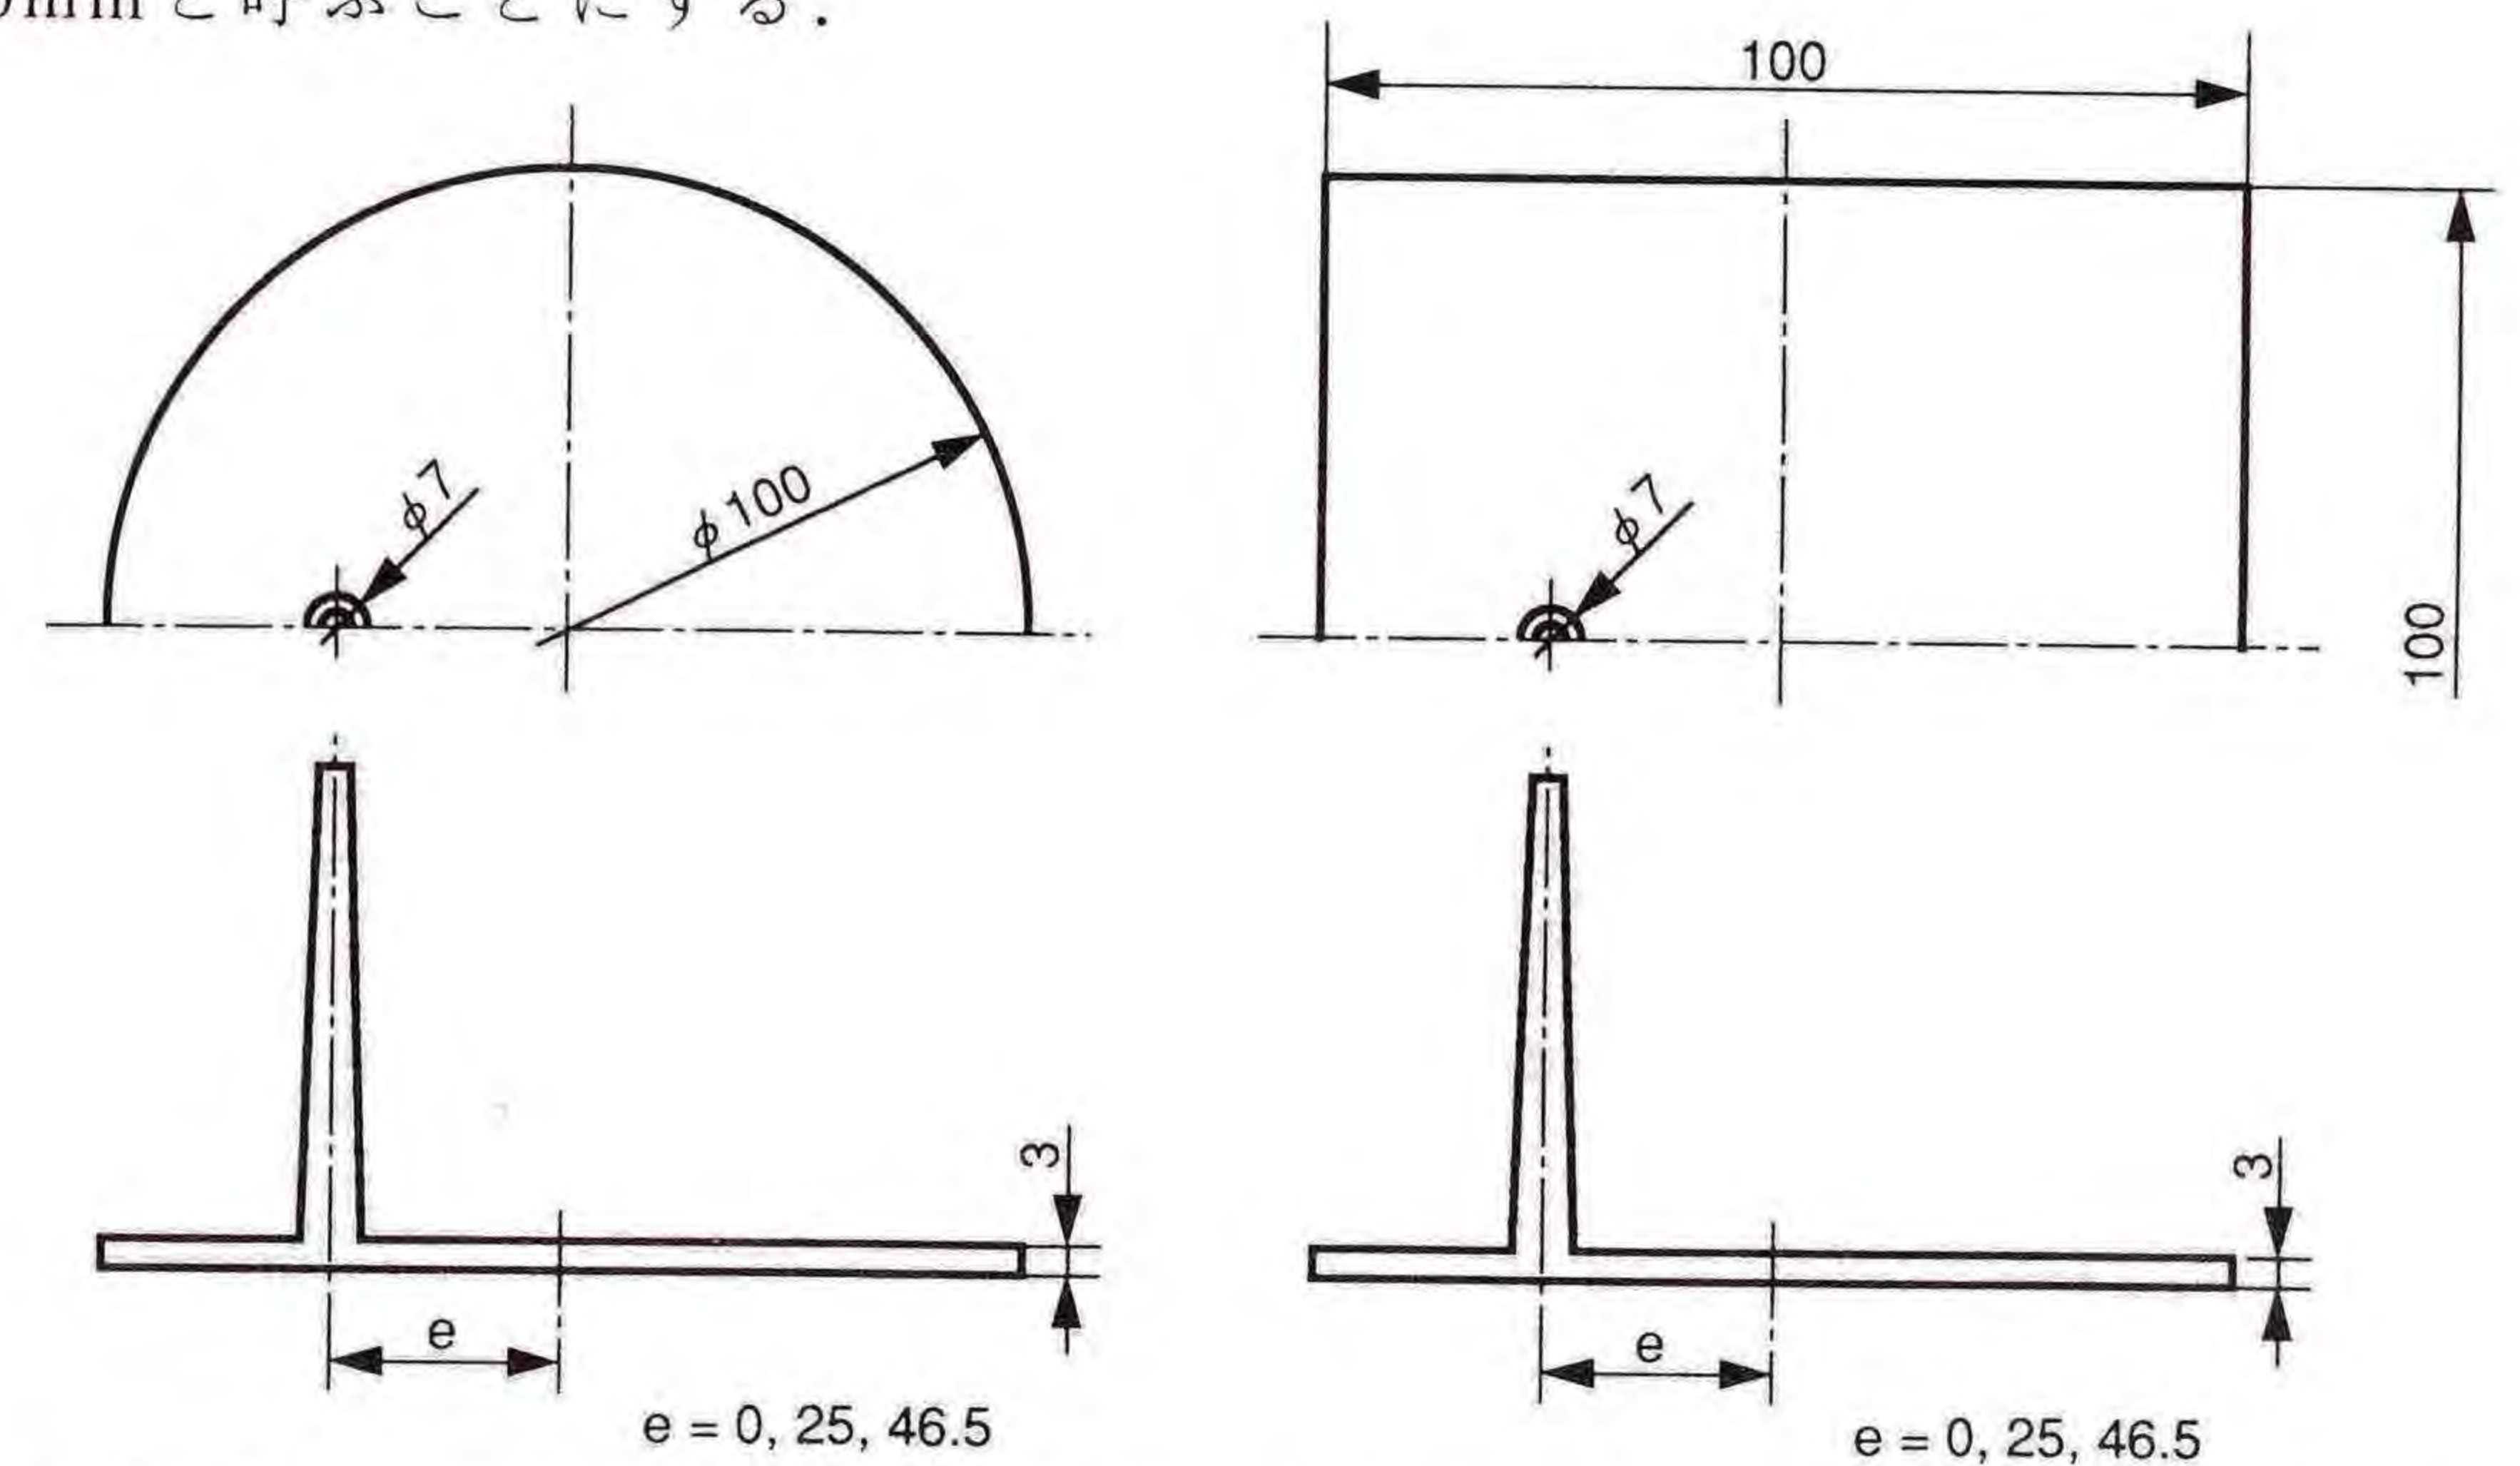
Shape and dimension of the specimen. (Circular plate) Fig.2-2 Shape and dimension of the specimen. (Square plate)
